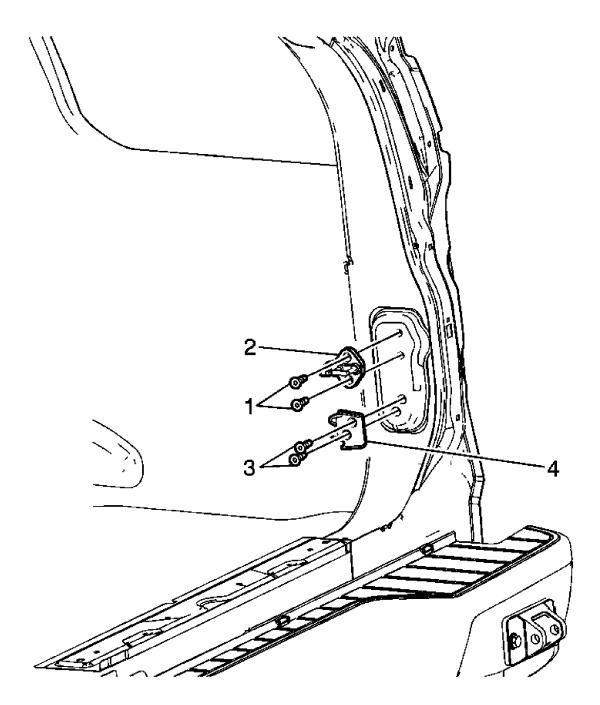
Lock Striker Replacement - Endgate Courtesy of GENERAL MOTORS CORP.
